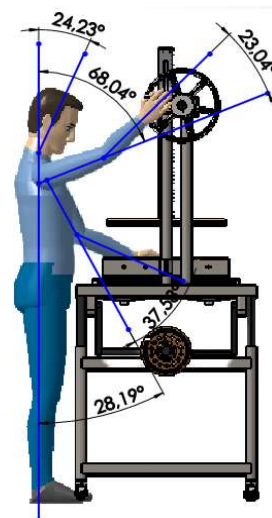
Measurement of working posture after design improvement of printing & pressing tools
